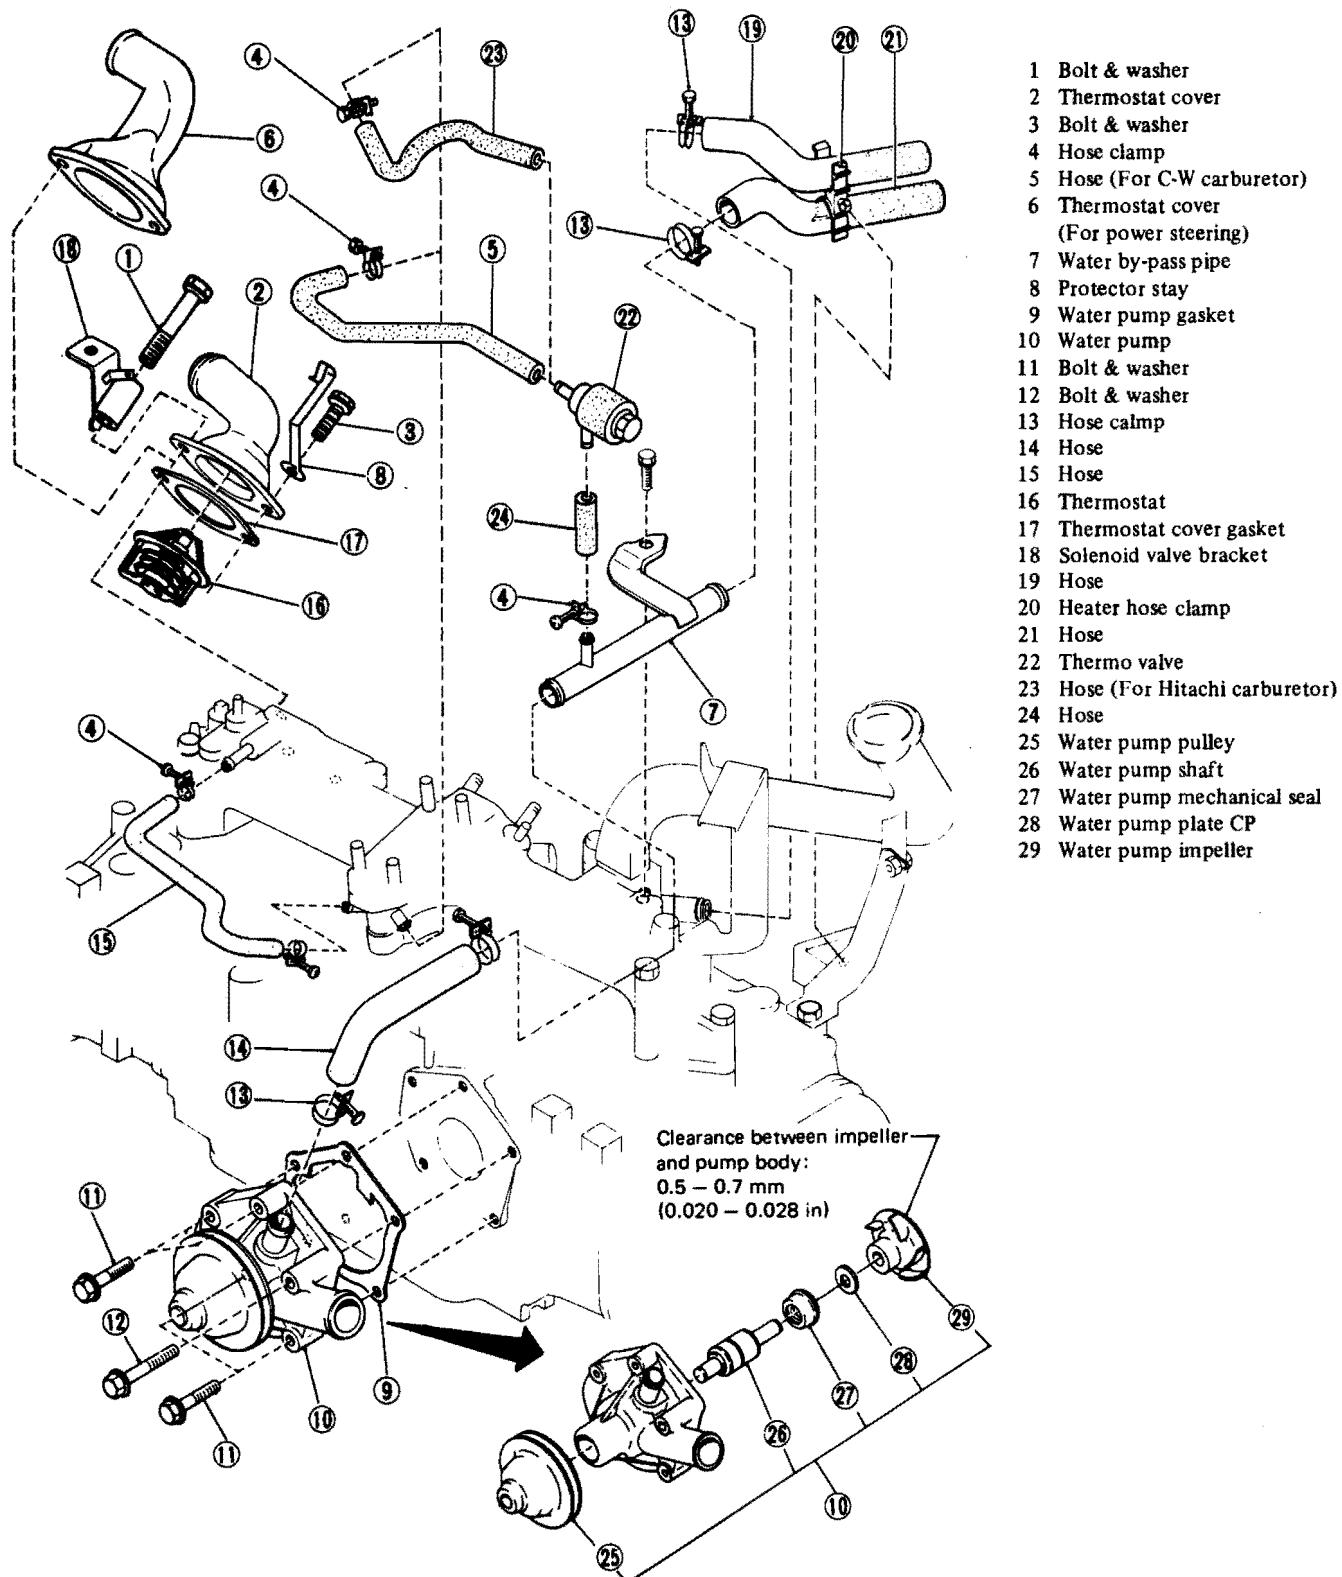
Engine cooling system (Water pump and relative fittings)
